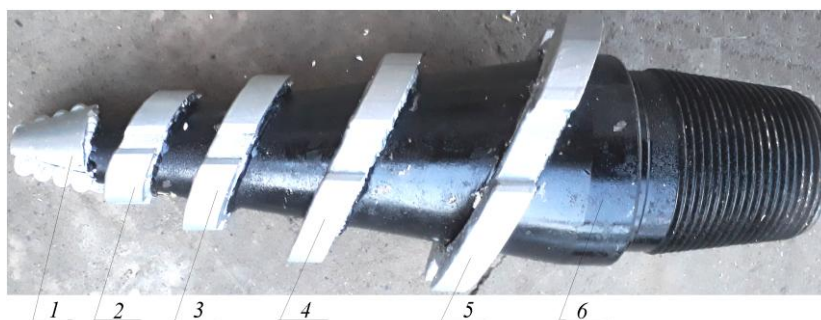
Drilling tools with cutting teeth made of high-speed steel grade P6M5
